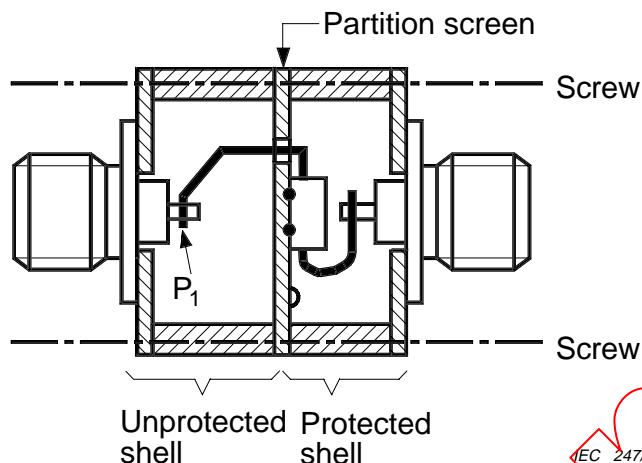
Example of a type B test fixture with a four-terminal DUT in non-feed-through configuration
